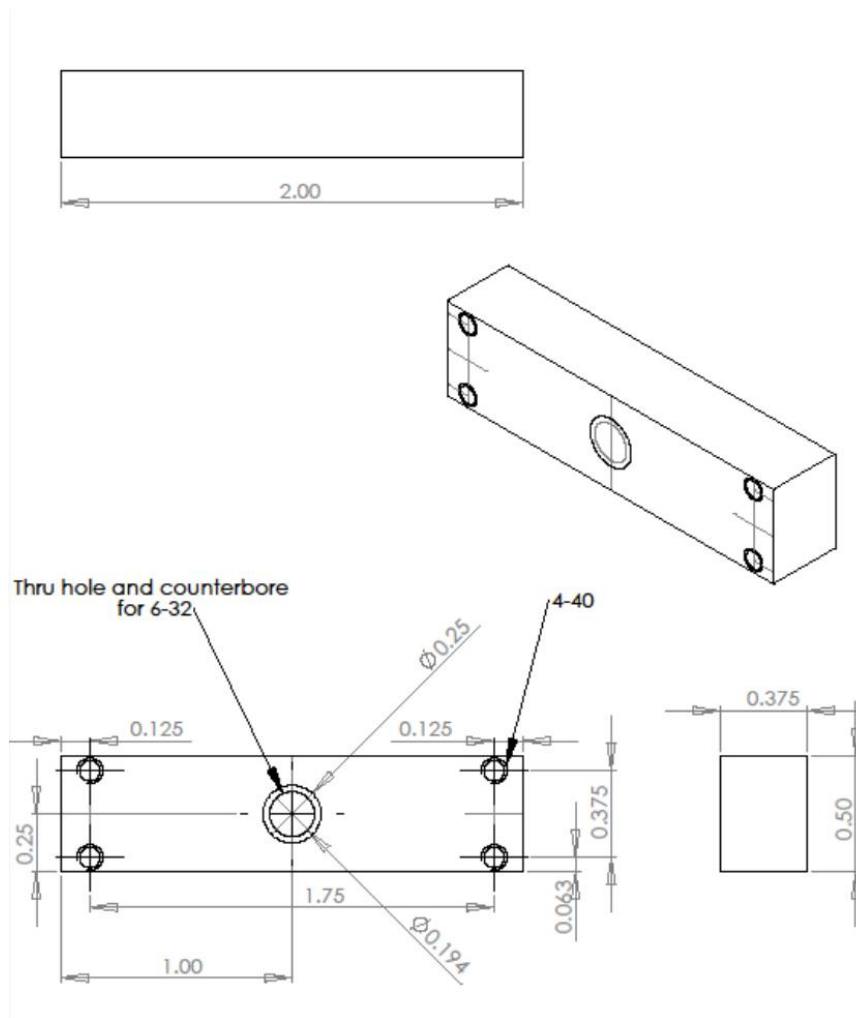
Schematic for bottom of C-C Fixture. Dimensions in inches.
